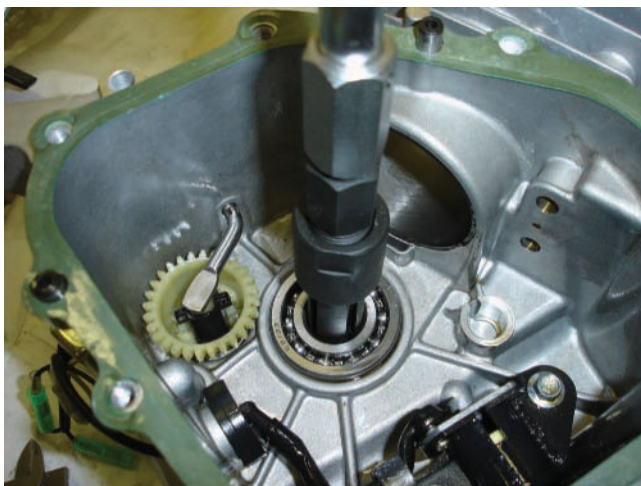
Removing a ball bearing using a special tool that fits on the inner race.
